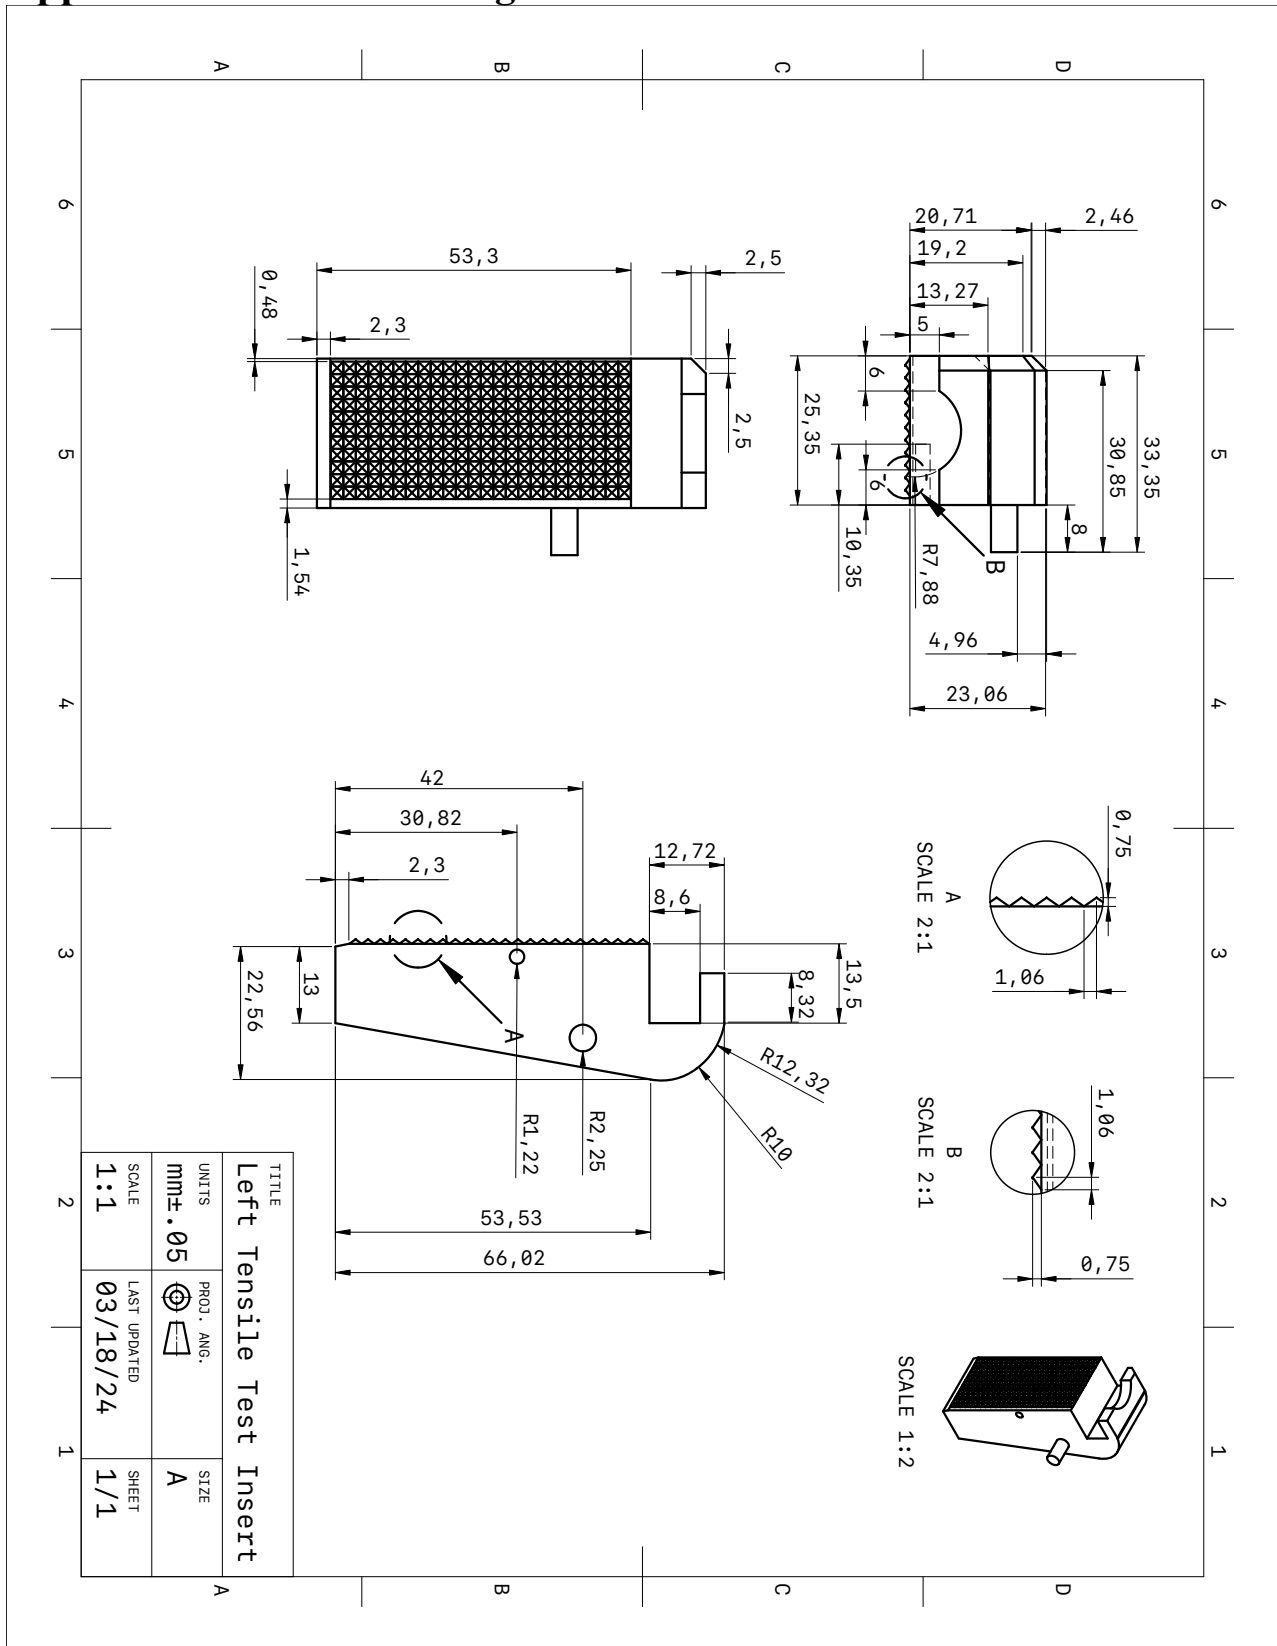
Engineering drawing of the left insert used for tensile testing. The drawing is intended for 3-D printing using plastics. The hole of radius 1.22 mm was left for a piece of metal to be inserted. In the tensile testing apparatus, one end of the spring is placed around the piece of metal as the spring tightens the clamps as it is loaded. The hole was placed as the plastic used for the insert was not strong enough to support the spring force, so a stronger material was required.
